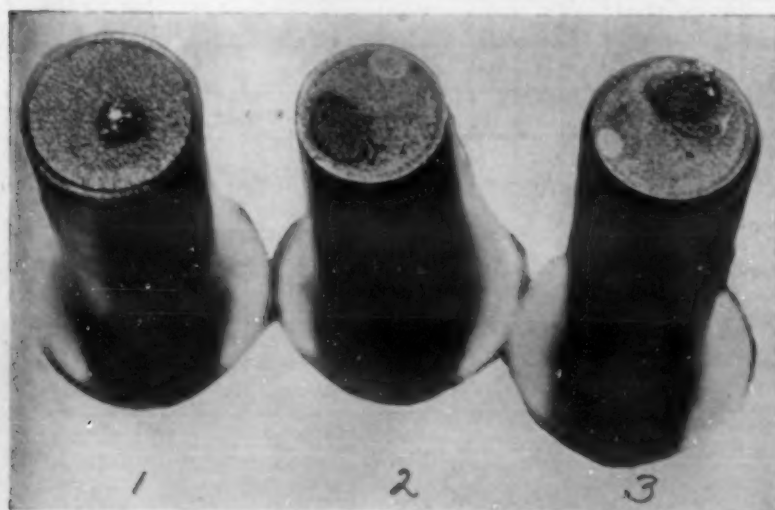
Fatigue failure of specimen subjected to reversed bending.
